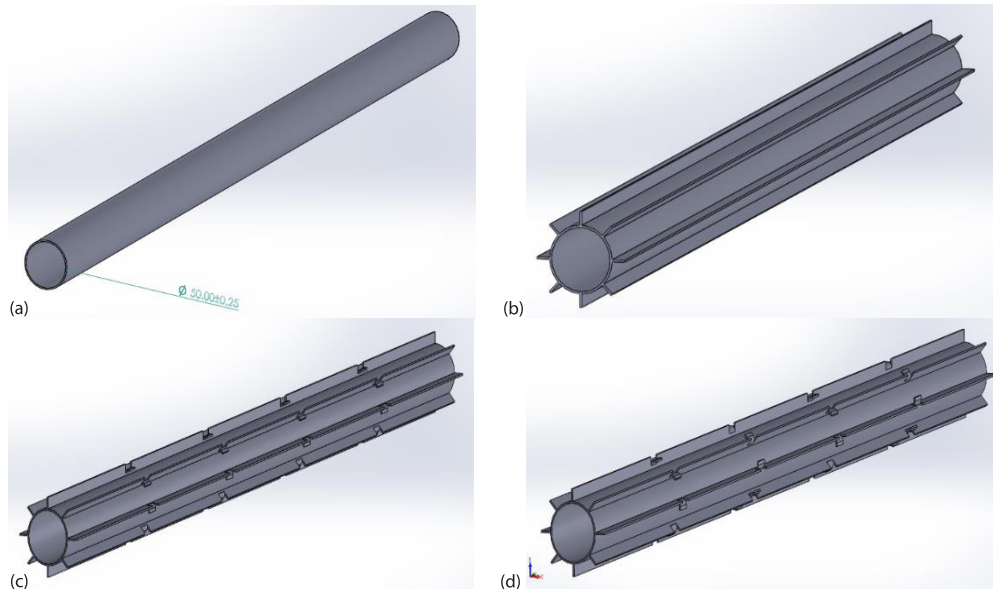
Inner tube model in solid works; (a) normal, (b) with fins, (c) fins with horizontal wing cuts, and (d) fins with alternate horizontal wing cuts
